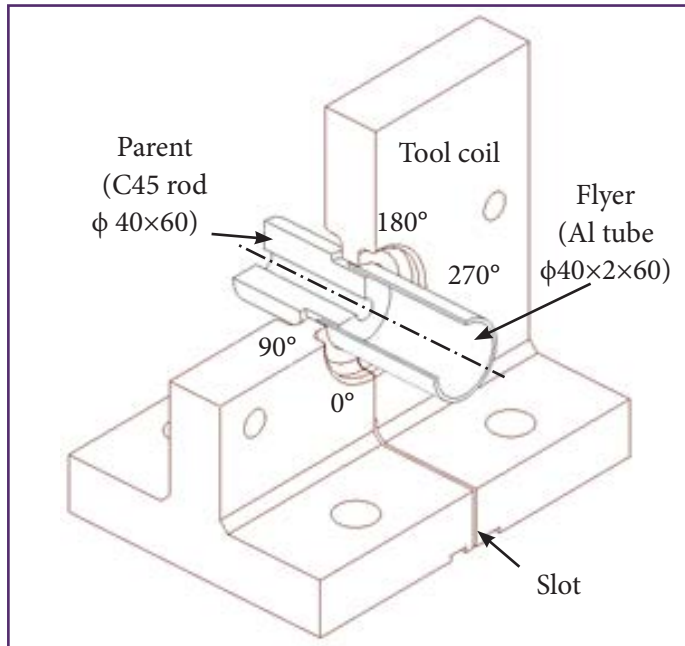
Sectional view of the joining setup without insulators and centering parts (all values in mm)
